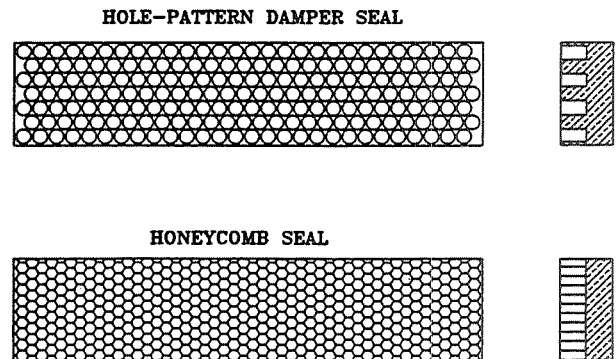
The surface configuration for hole-pattern damper and honeycomb seal
